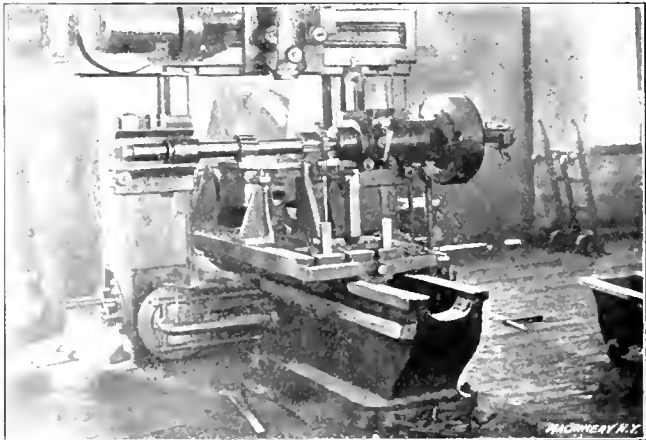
Surfacing the Bottom and One Edge of the Bed
